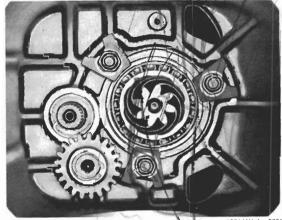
Double tapered-roller pinion pearing held by retainers inside differential housing. This method applies to early models only.
